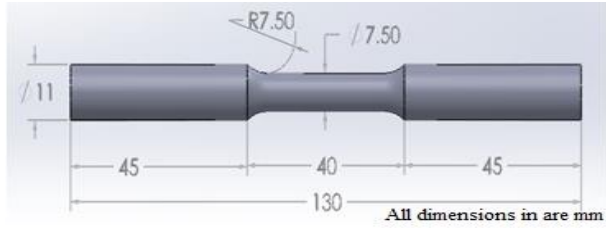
Test specimen size and its dimension considered fatigue testing line diagram
